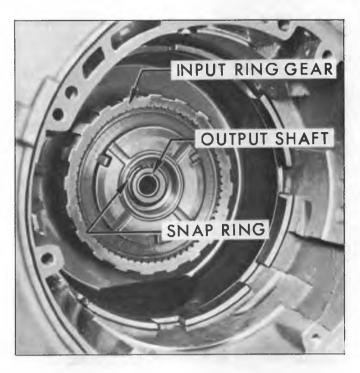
M-Removing Output Carrier to Output Shaft Snap Ring
